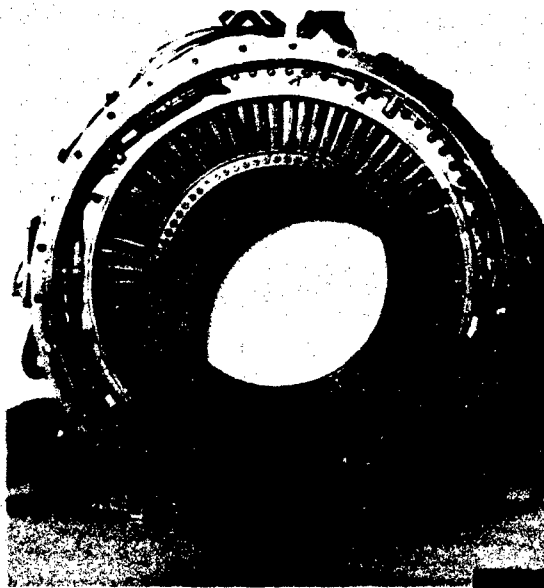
Build I, Full Front View of Second Assembly (XPN-18129)
